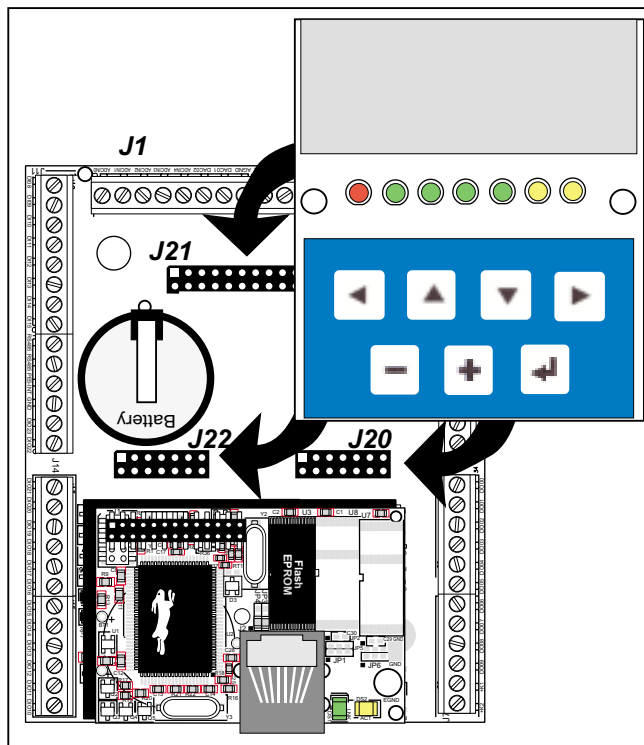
Install LCD/Keypad Module on BL2100 Main Board
